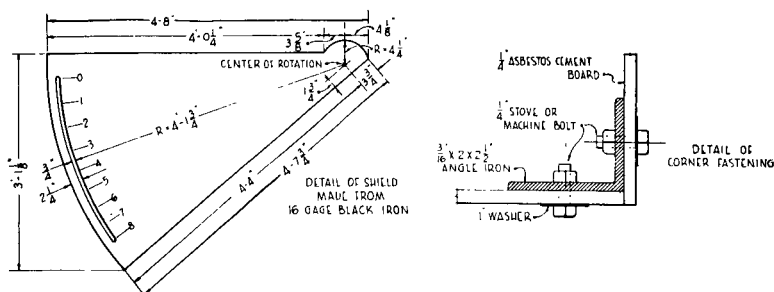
(Continued).—Detail of Tilting Frame to Hold Test Roof Deck.
